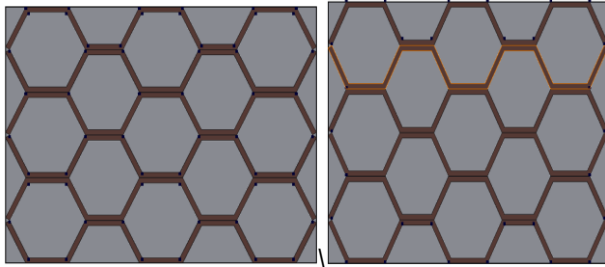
(a) Spot weld location (dark spots) between core and top panel (b) Spot weld location (dark spots) between core and bottom panel.
